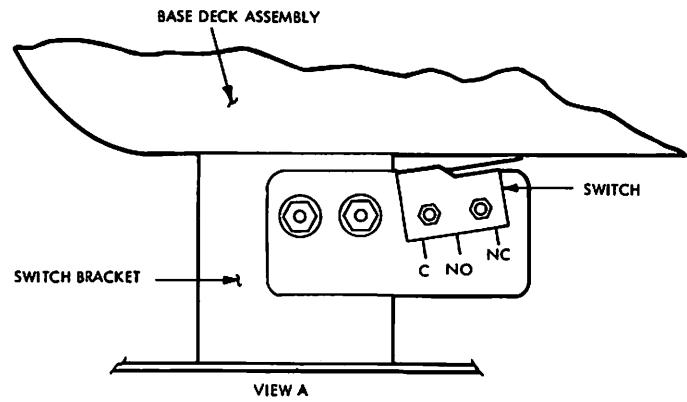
B. DECK DOWN INTERLOCK SWITCH ADJUSTMENT
